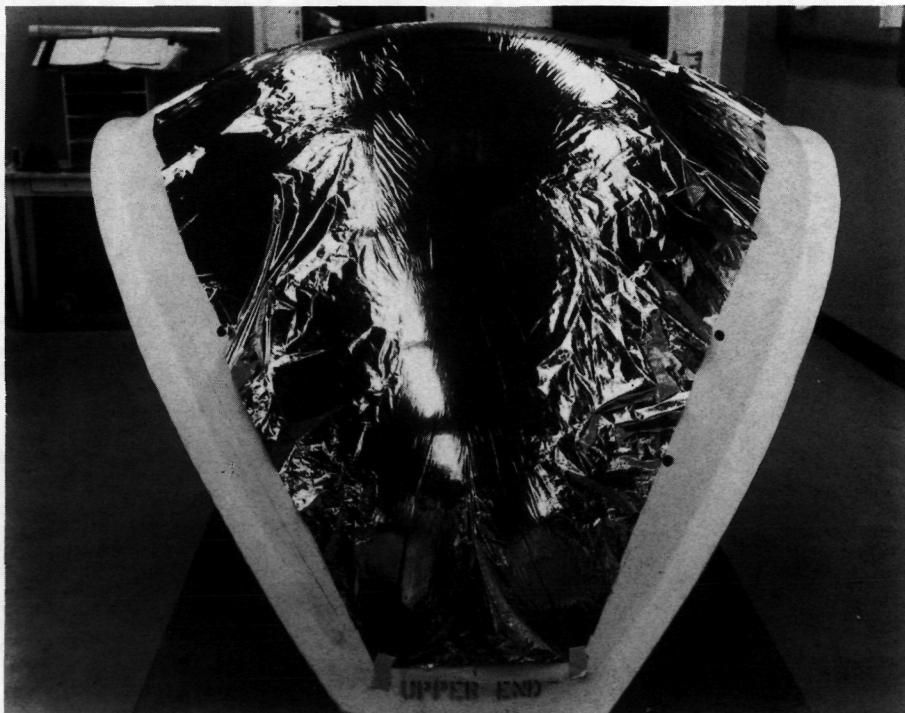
Layup of single sheet of double-aluminized Mylar to demonstrate degree of forming achieved.
